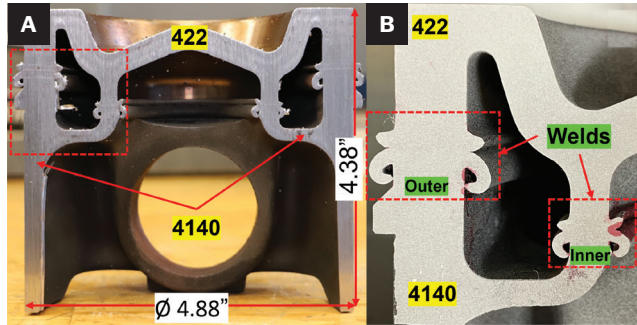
A – An example of the cross section of the welded piston with 422 crown and 4140 skirt (Ref. 9); B – two friction welds, outer weld (left) and inner weld (right), are highlighted.
